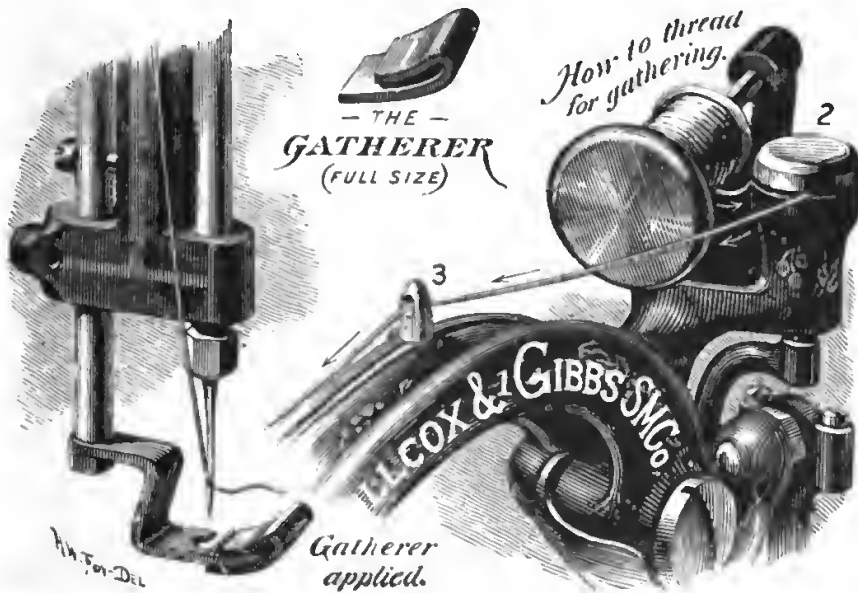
Shows Foot Gatherer (Full Size), and as Applied to Presser Foot, also How to Thread for Gathering
